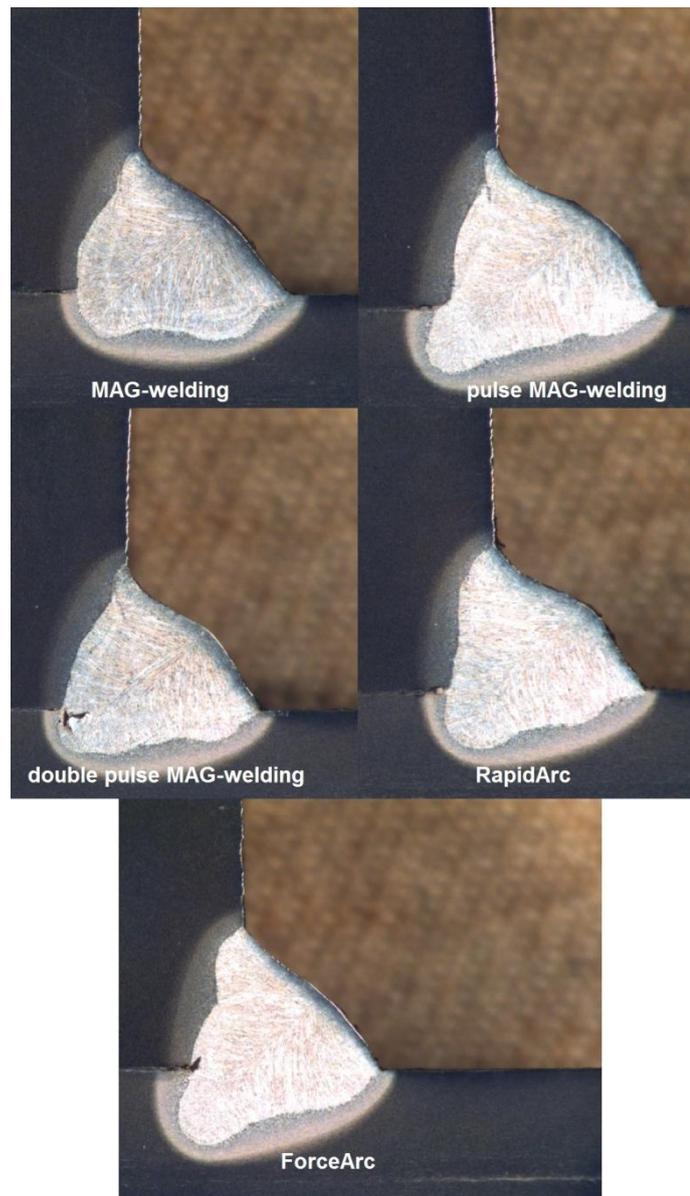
Macrographs of welds in welding position PB with throat thickness of 4 mm.
